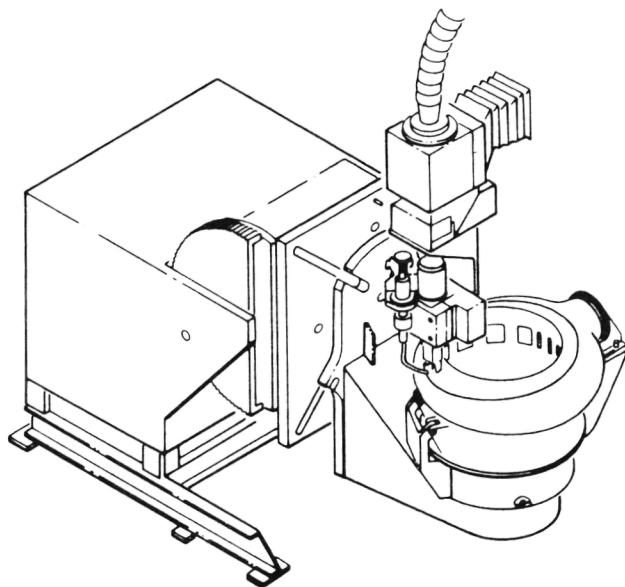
SSME Fuel Preburner Welding Tool.
